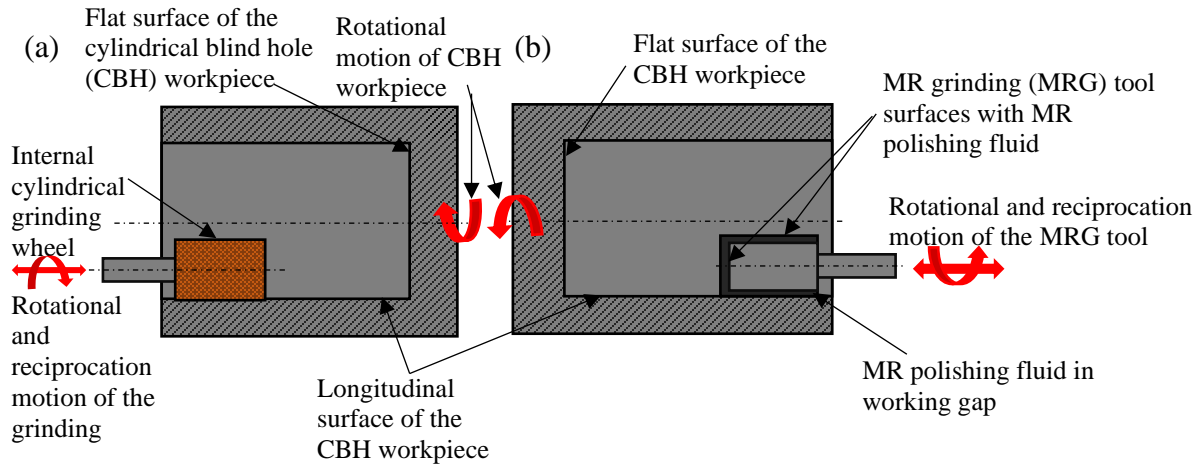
Schematic diagram with working principle of the (a) traditional internal cylindrical grinding process and (b) the proposed process with the MR grinding (MRG) tool used to finish the longitudinal as well as flat end surfaces of the cylindrical blind hole (CBH) workpiece.
